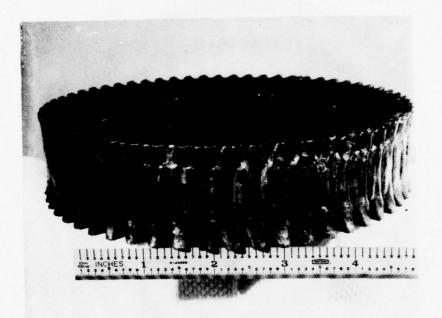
Lower sun gear after 54-minute loss-of-lube test of optimized transmission configuration number 2.
